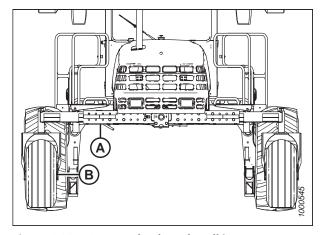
Caster Wheels and Walking Beam – Engine-Forward View
